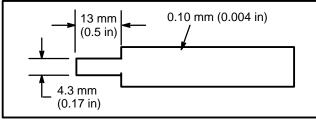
INSTALLATION TOOL FOR REAR OIL SEAL
